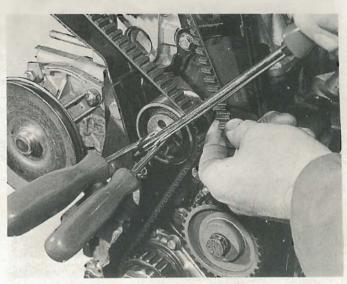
FIAT special tools for timing belt adjustment assembled on tensioner pulley (Sec 16)
